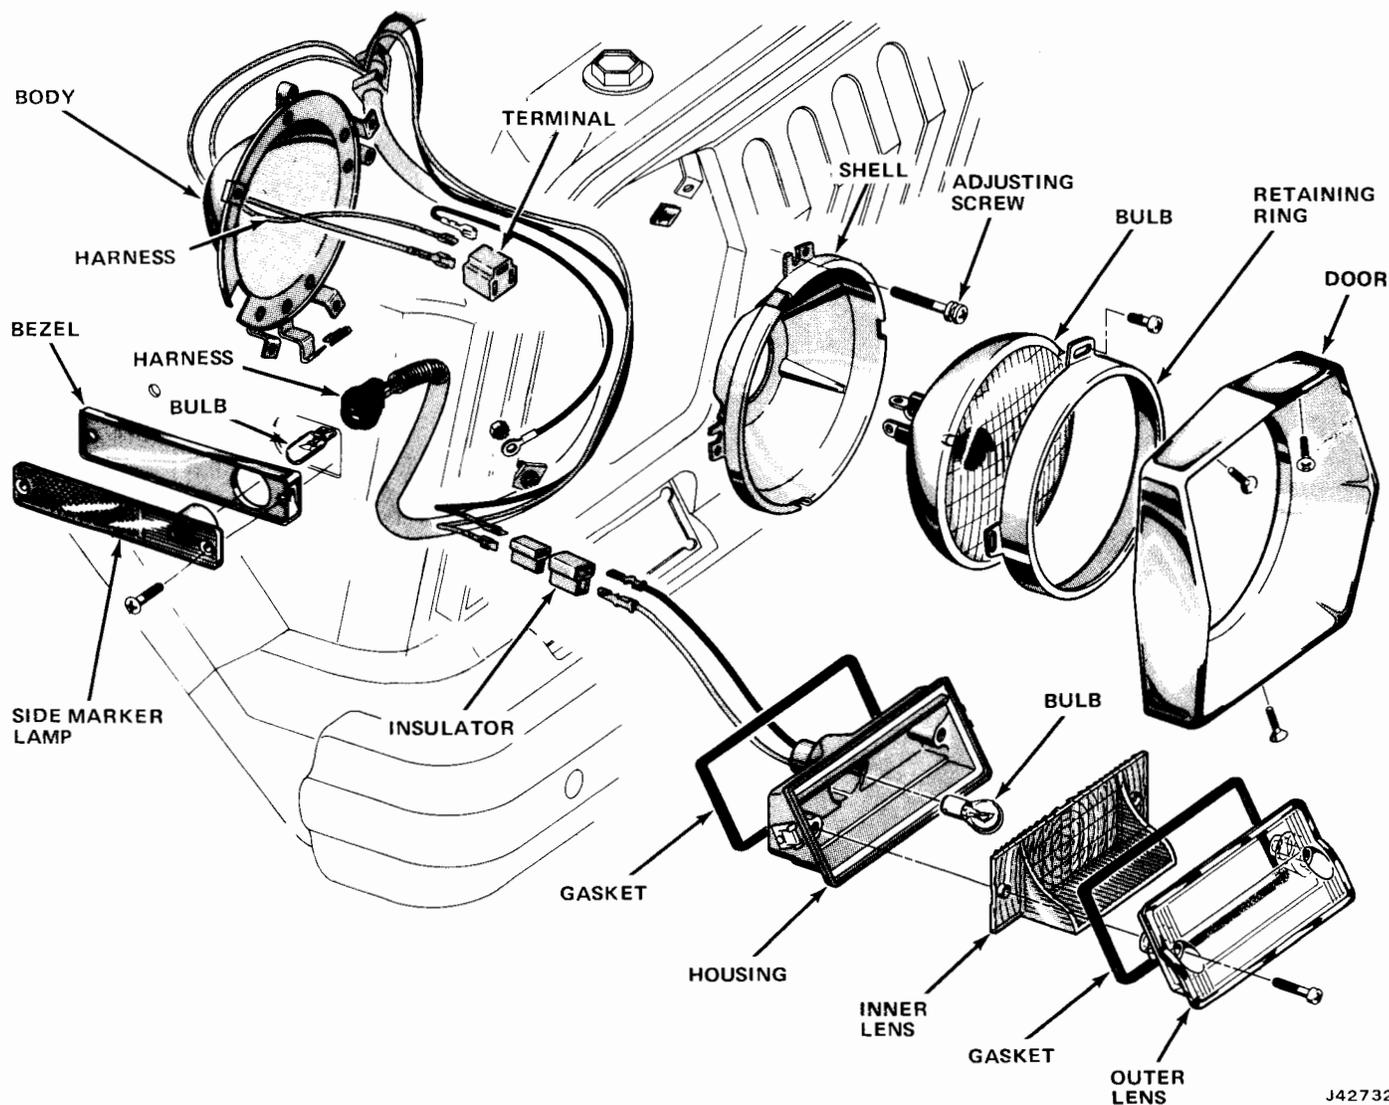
Headlamp, Parking, Directional, and Side Marker Lamps— Cherokee-Truck
